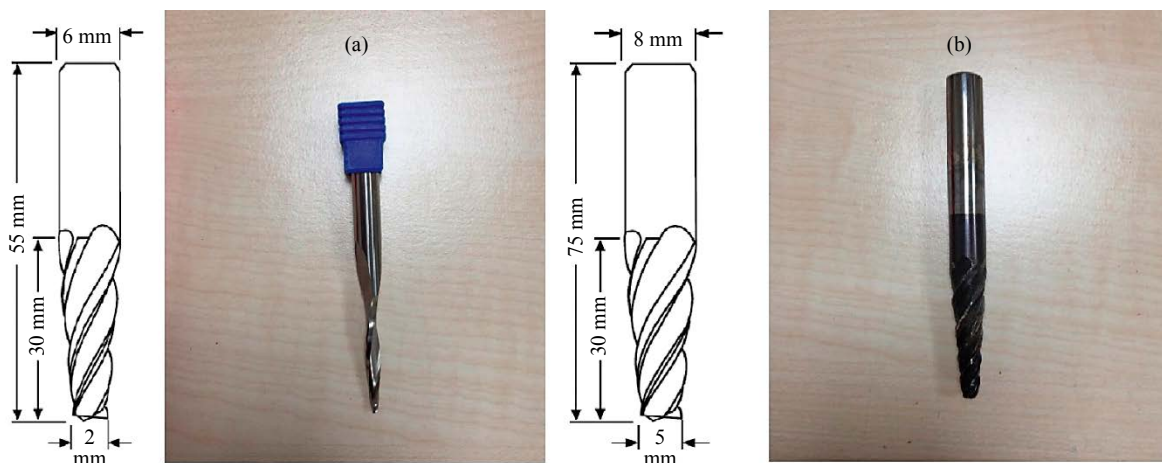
Cutting tool dimensions of 2 (a) mm and 5 (b) mm diameters
